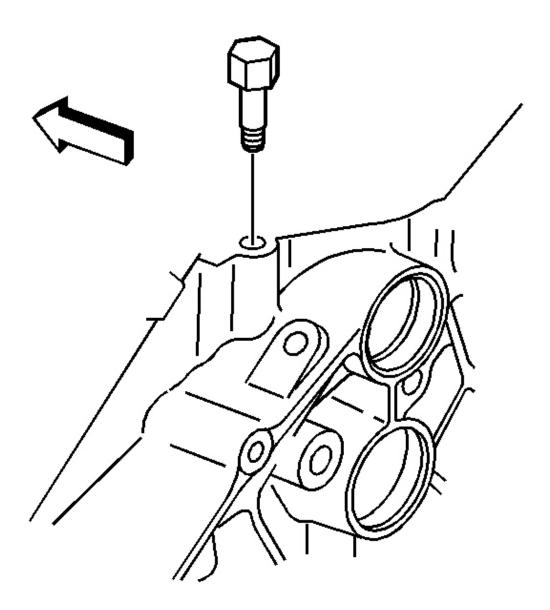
Engine Oil Pressure Sensor Fitting Courtesy of GENERAL MOTORS CORP.
